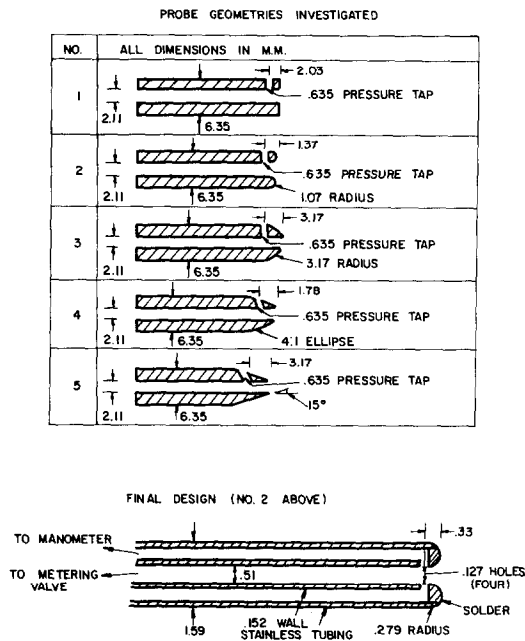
Mass flux probe inlet geometries tested and details of final design.
